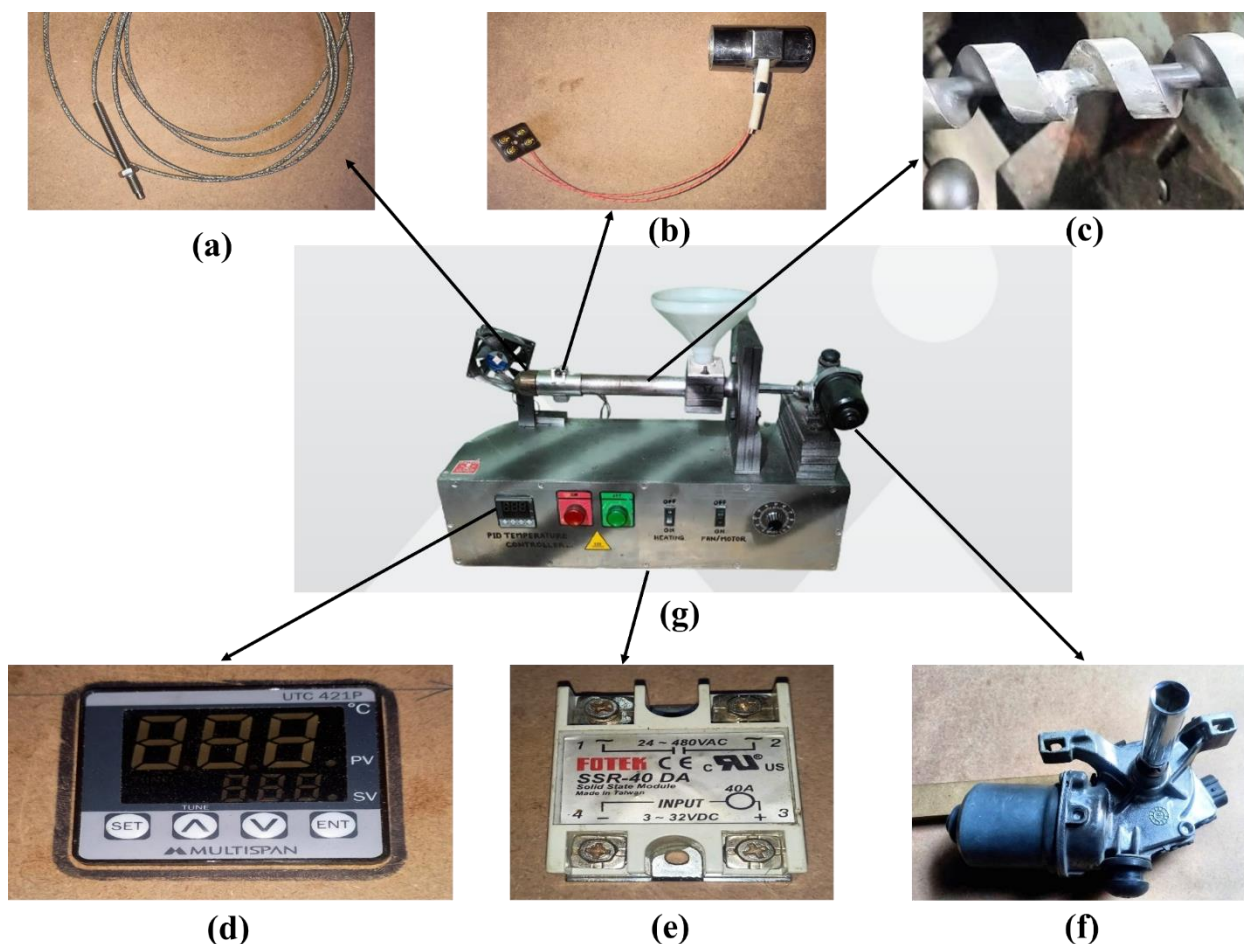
In clockwise. (a) Thermocouple; (b) Band Heater; (c) Extruder Screw; (d) PID Controller; (e) SSR; (f) Motor and (g) Extruder Machine.
